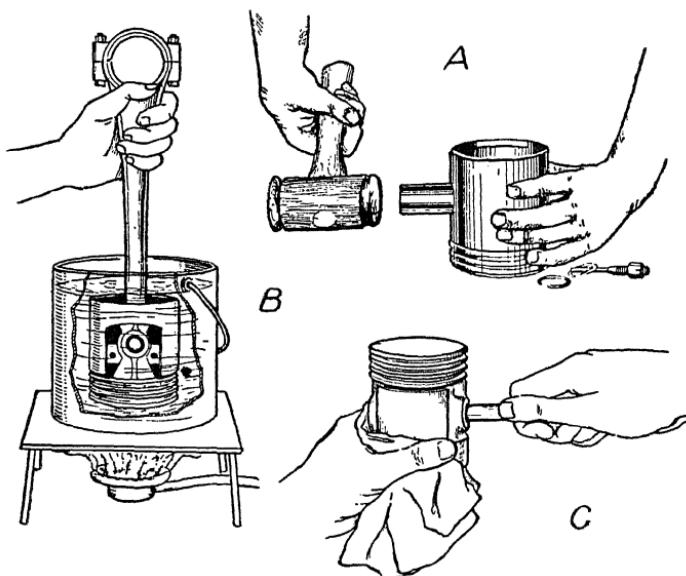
A*—Drive Fit for Piston Pin in Cast-Iron Piston
